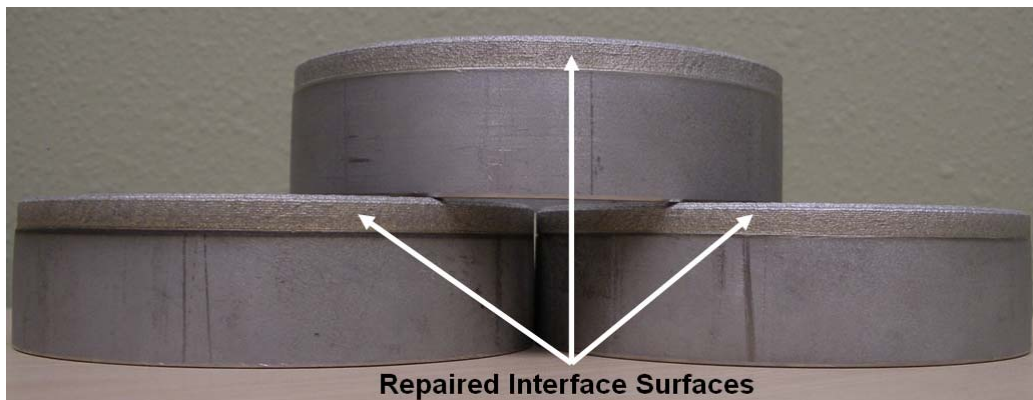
Close Up View Shows the LENS Repaired Section of Step Joint Rings
